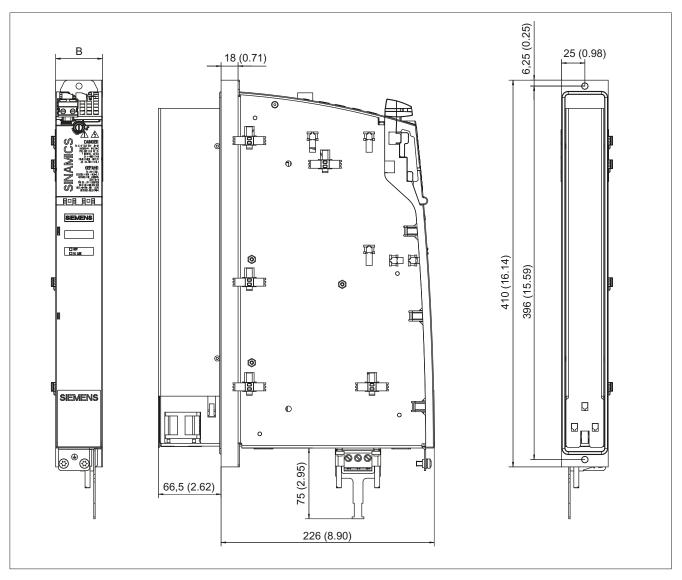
Dimension drawing of 5 kW and 10 kW Smart Line Modules with external air cooling, all dimensions in mm and (inches)
